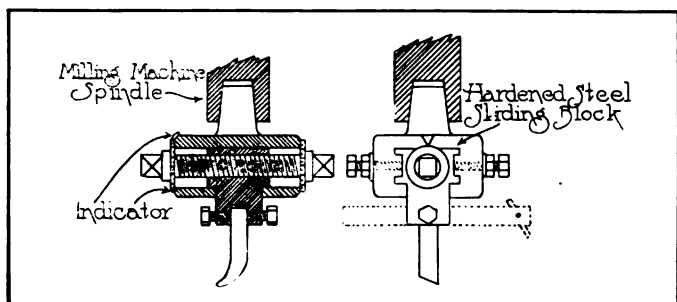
Illustrating Boring Attachment Adaptable to a Vertical Milling Machine.
